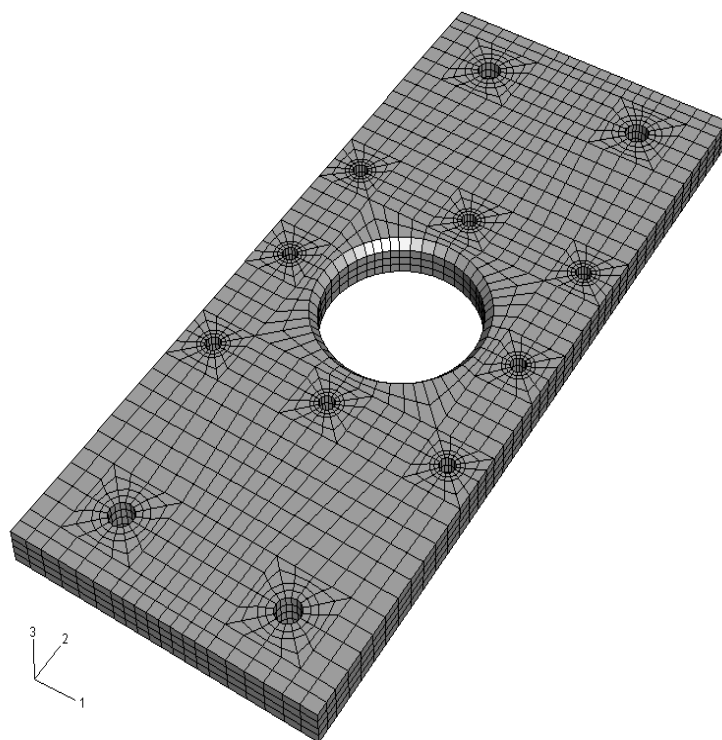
Plate specimen fixture; bottom plate component finite element mesh.
